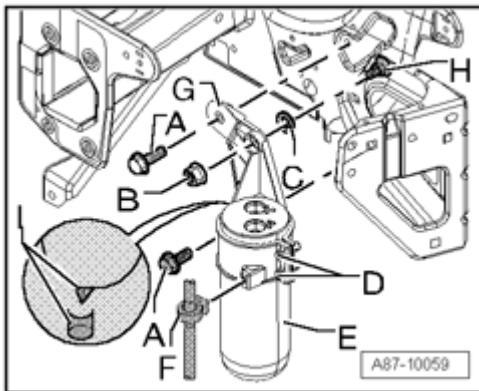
Identifying Bolts, Nuts, Refrigerant Pipe Holder, And Reservoir
